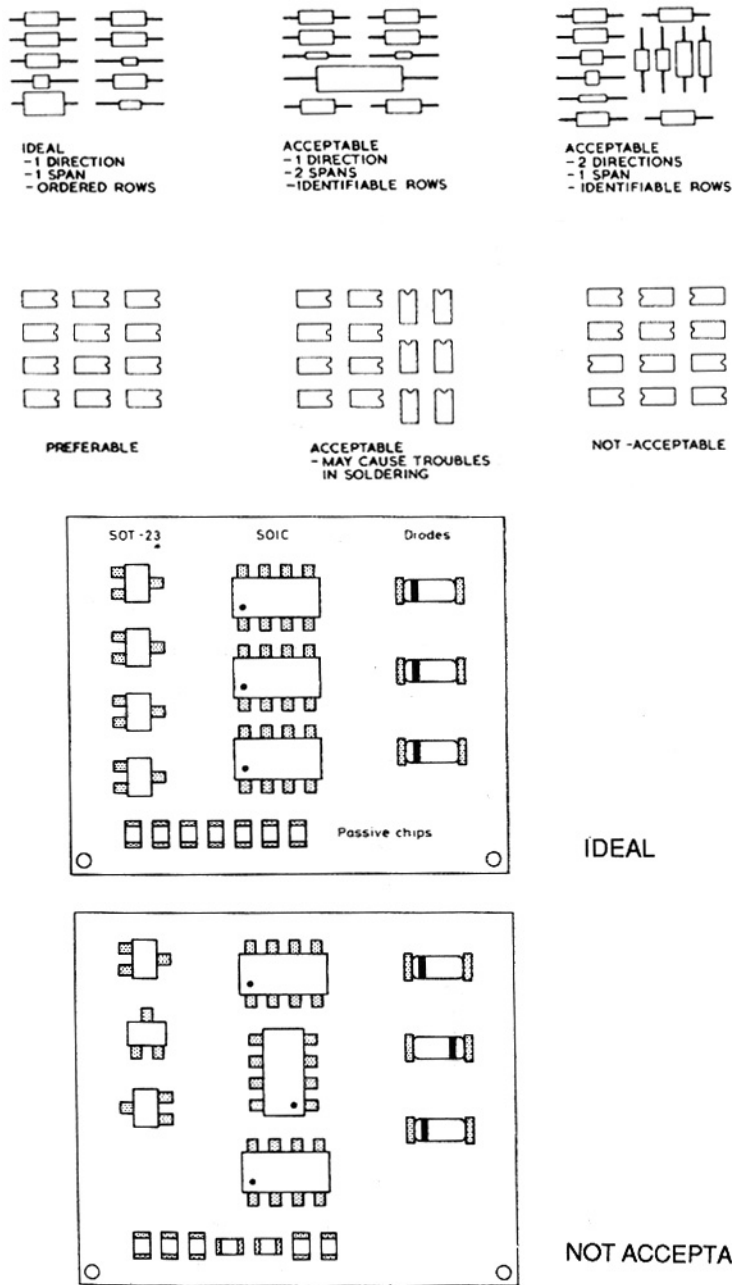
Proper component placement for hole- and surface mounted components [6.1, 6.2].
